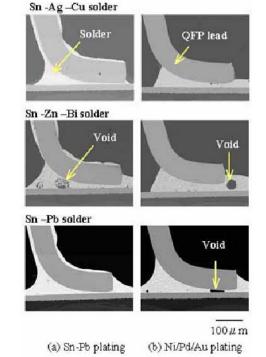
Cross - sectional BE Image of QFP Solder Joints after Assembly Process
